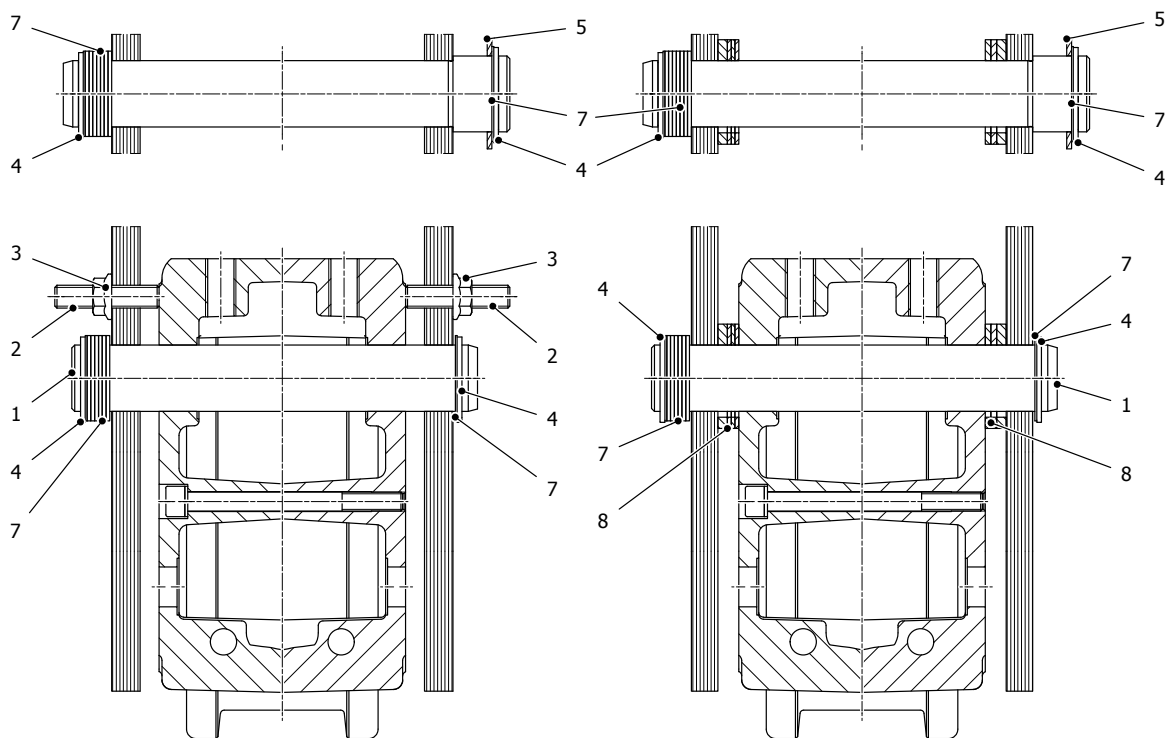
Bolt connection with alignment of the mean track via socket set screw (left-hand illustration) or spacer plates (right-hand illustration)
